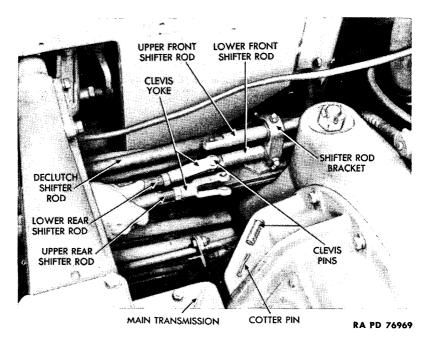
Removal of Auxiliary Transmission Shifter Rod
